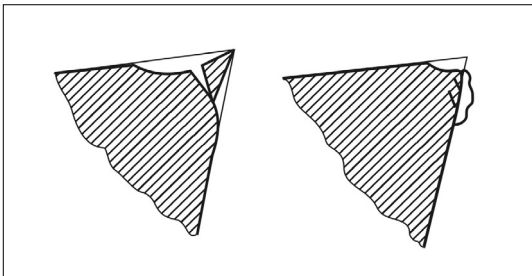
Fracture (*l*) and deformation damage (*r*) of machining tool
